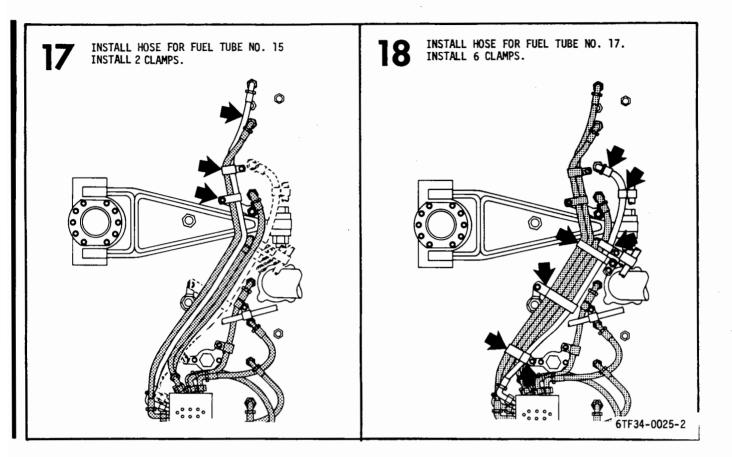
Fuel Manifold Installation (Sheet 6 of 6)
